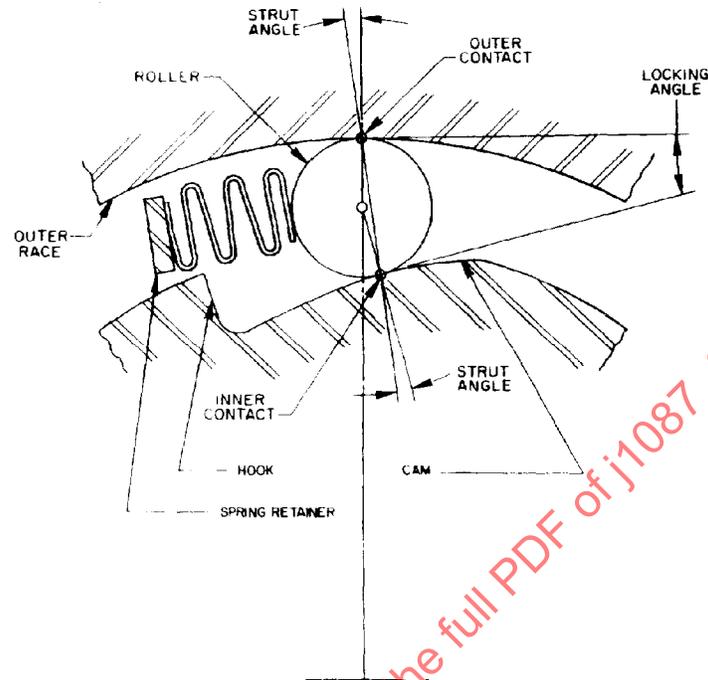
INNER CAM TYPE ROLLER ONE-WAY CLUTCH DIAGRAM
